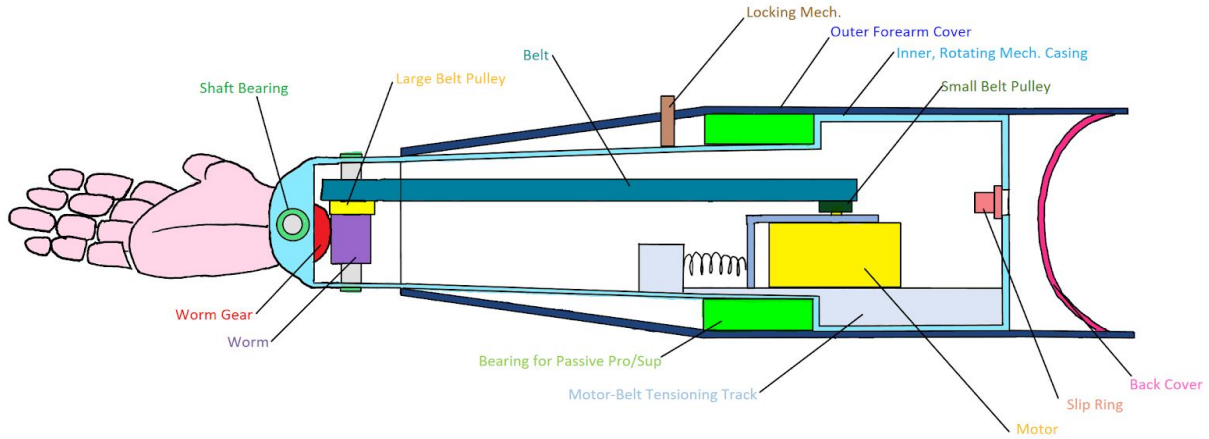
Labeled drawing showcasing the final design for the prosthetic device. Drawing showcases the nested sleeve mechanism for passive pronation/supination with a locking mechanism and the active flexion/extension belt with a worm gear system. The tensioning wires and finger actuators were changed into linear actuators within the hand that are not shown. Additionally, the water- and debris-proofing design is not included in the drawing above. Ultimately, this requirement will be achieved by covering the hand and wrist in a long, thick plastic glove that is clamped to the outer casing.
